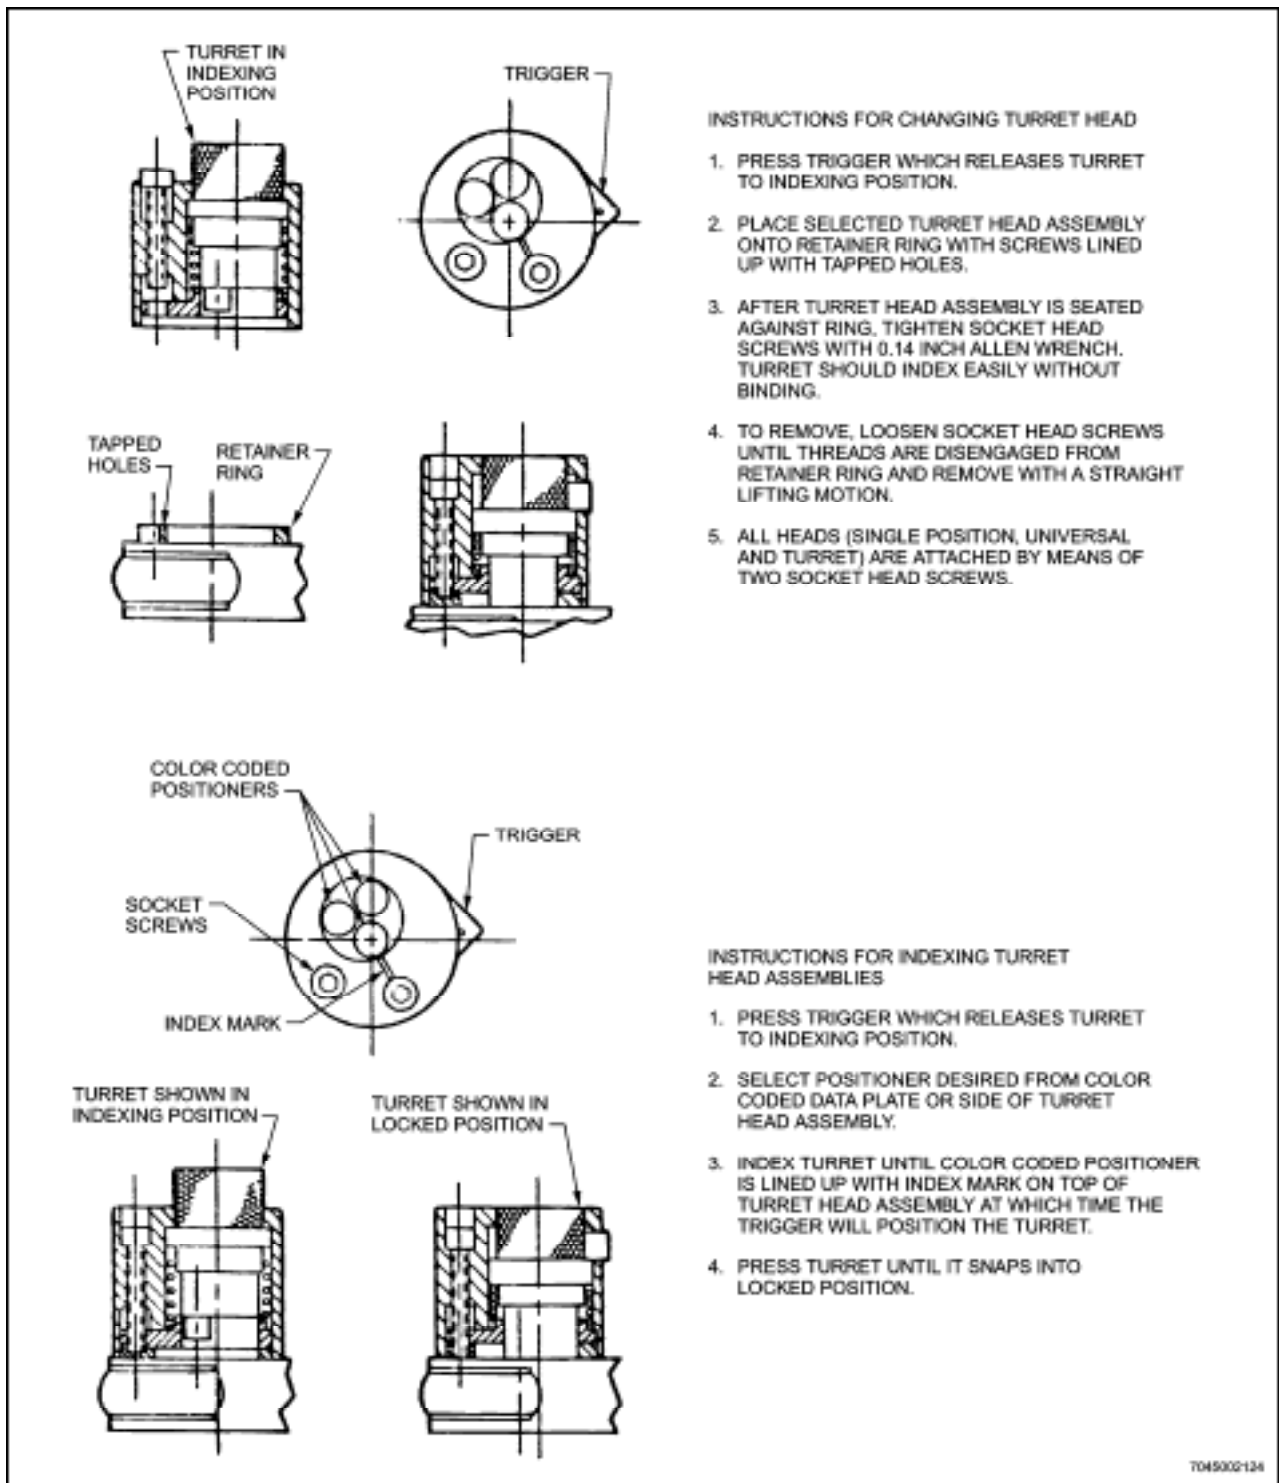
M22520/1-01 Crimping Tool Turrets
